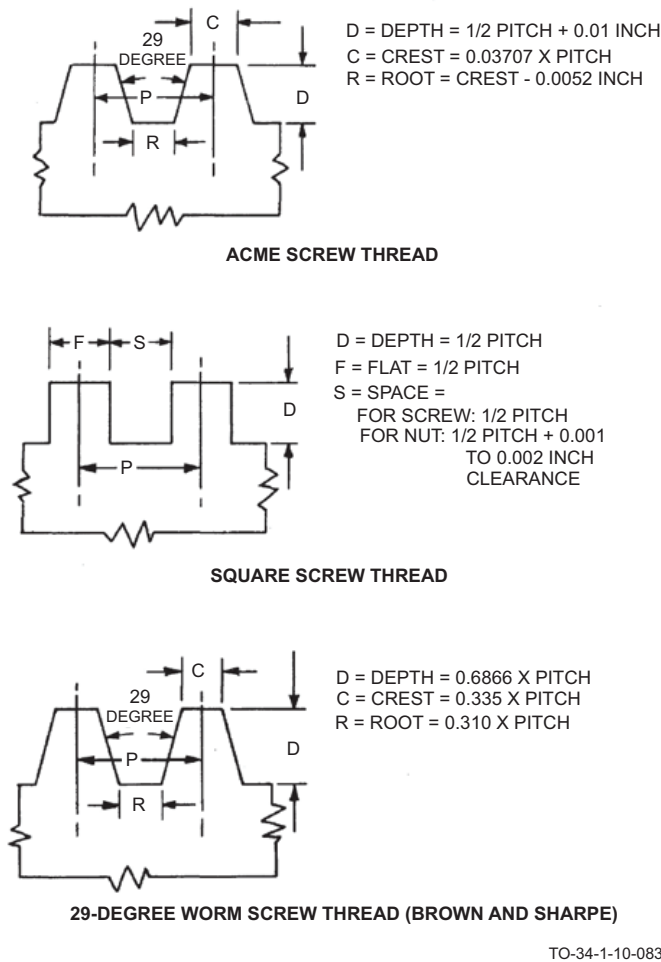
General Form Dimensions for Acme, Square, and 29 Degree Worm Screw Thread Forms
